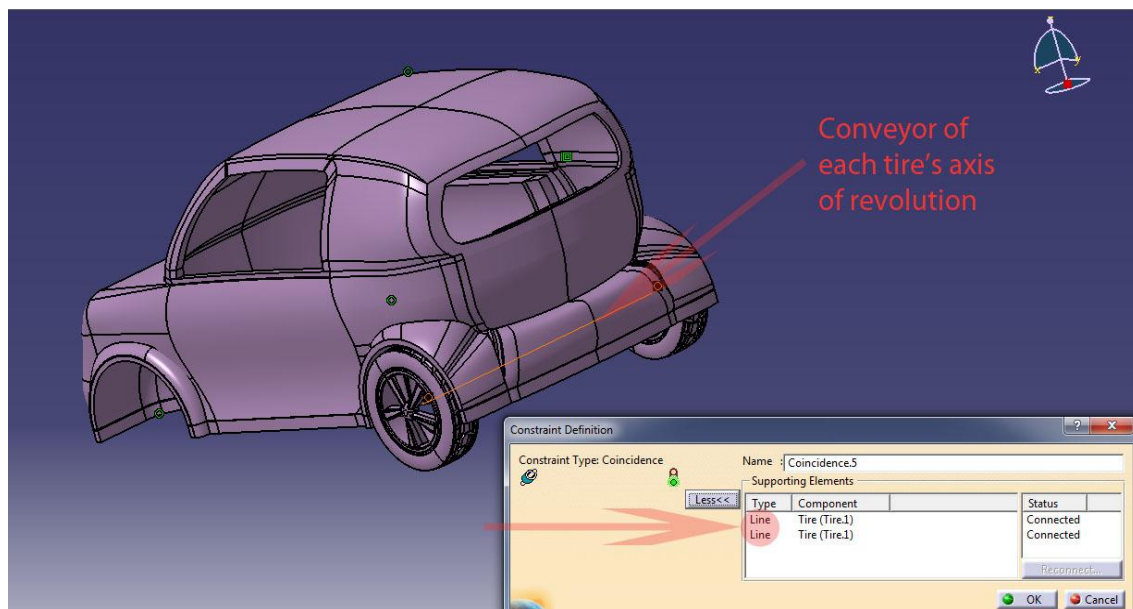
Steering wheel placement by implementing the coincide constraints.
